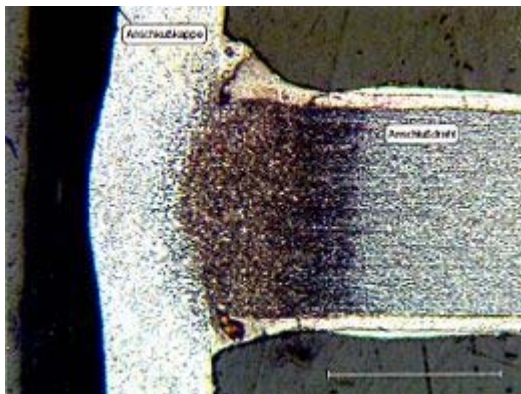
Cross Section CCS 30, Ø0.8mm; excellent Weld between Lead and Cap, Alloyed Material
